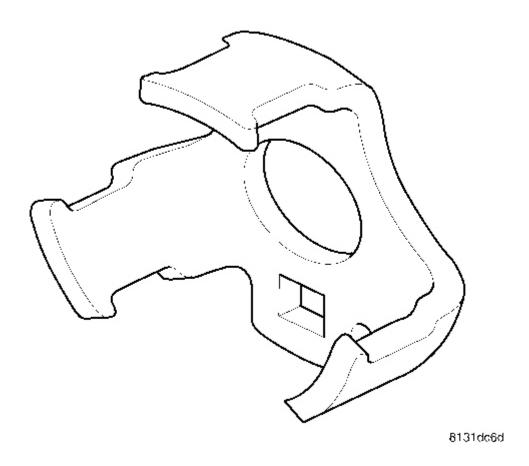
Damper Holding Fixture 9365 Courtesy of CHRYSLER LLC
